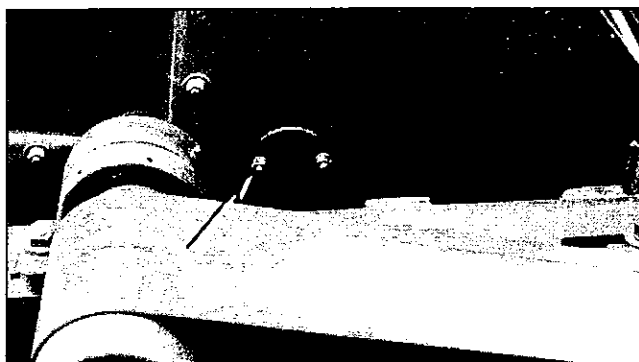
Hammermill removal hole (plate to be removed) (shields removed for clarity).
